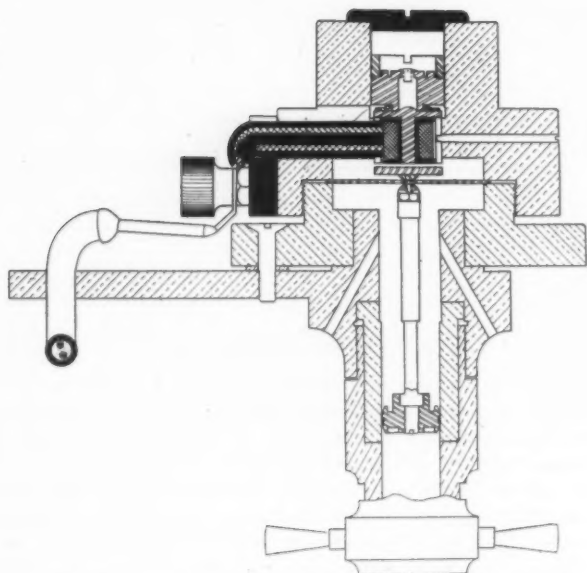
CROSS SECTION OF HIGH-SPEED INDICATOR
